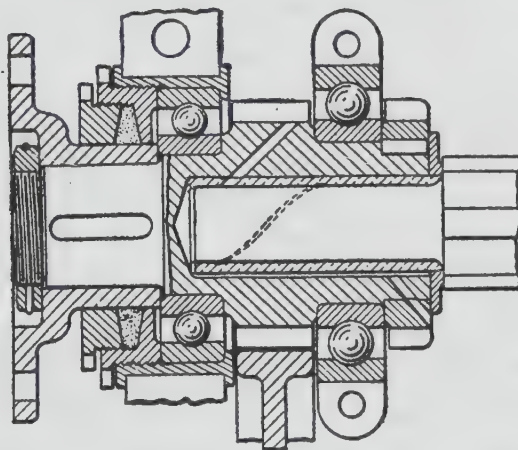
CONSTANTLY MESHED PINION WITH BEARINGS ON BOTH SIDES.
